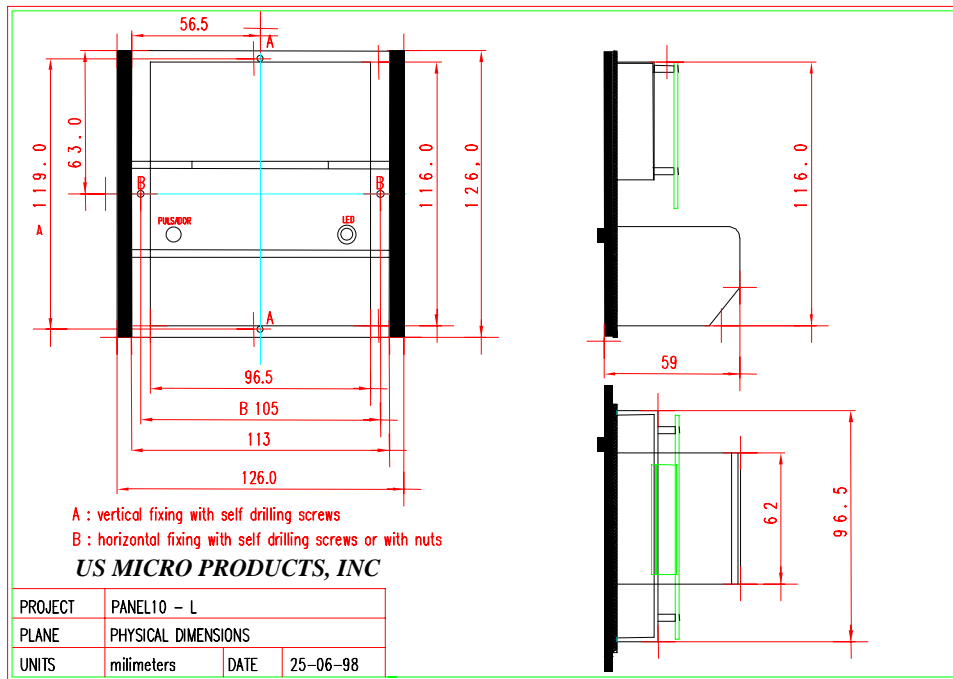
Physical dimensions for PANEL – 10 impact printers (L - chassis).
